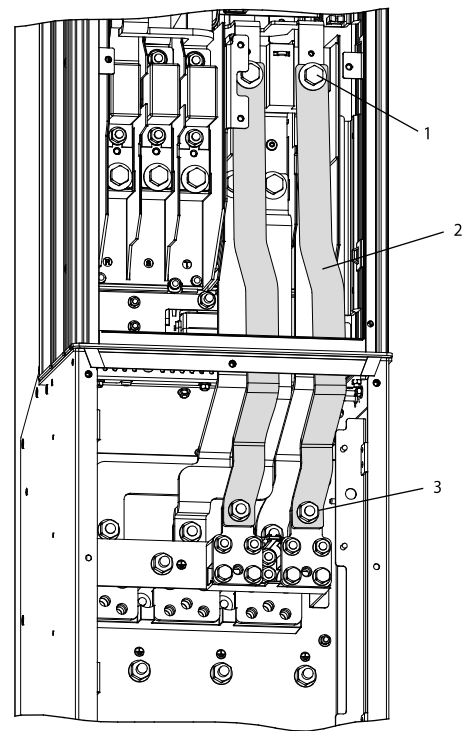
Attaching Motor Jumper Bus Bars on D1h
